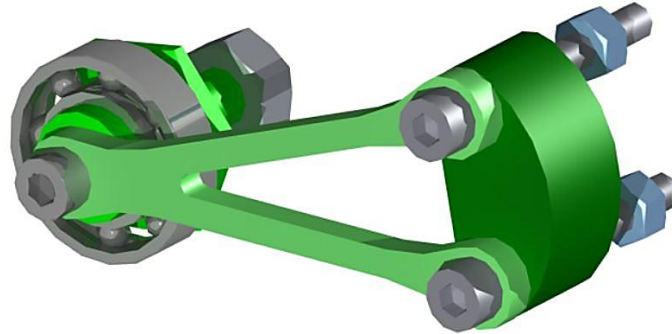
Supports for the secondary pulleys (final CAD drawing, CATIA V5)
